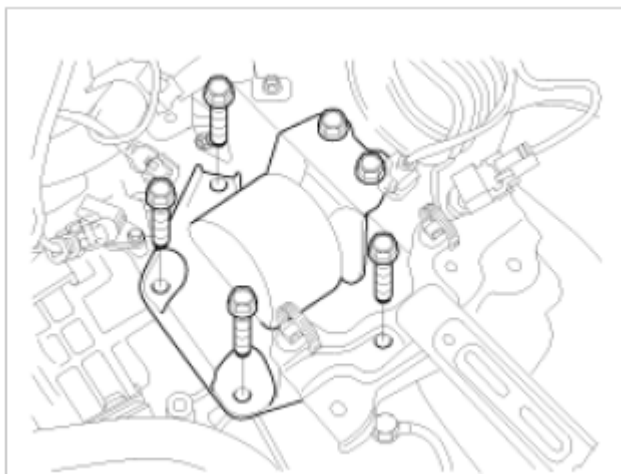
Identifying Transaxle Mounting Bracket Bolts
